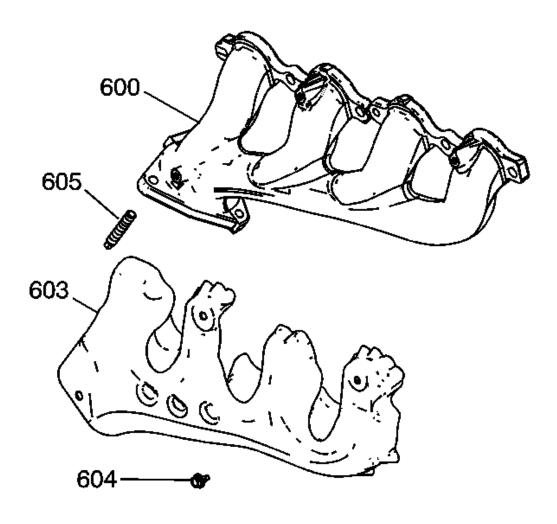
Exhaust Manifold Courtesy of GENERAL MOTORS CORP.
